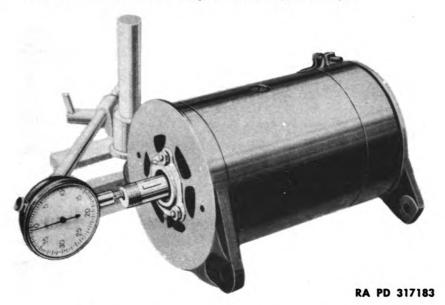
Measuring Generator End Play with Indicator (41-1-100)
